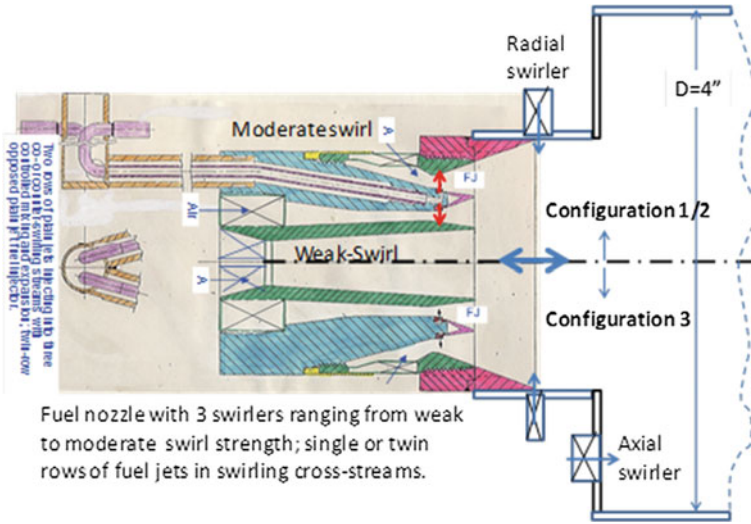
Schematic details of fuel nozzle and mixer installed in a 4-inch diameter can combustor [16]
